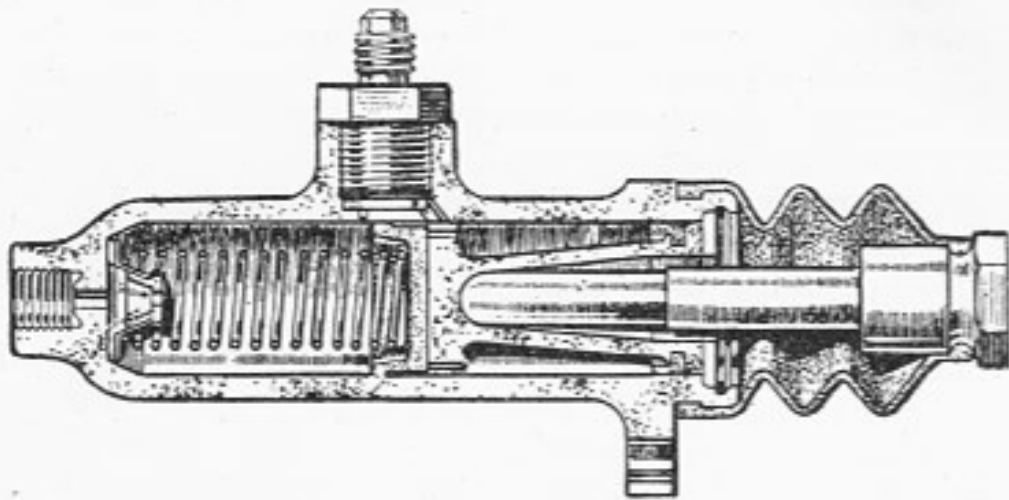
THE LOCKHEED BRAKE CYLINDER AND MECHANISM
